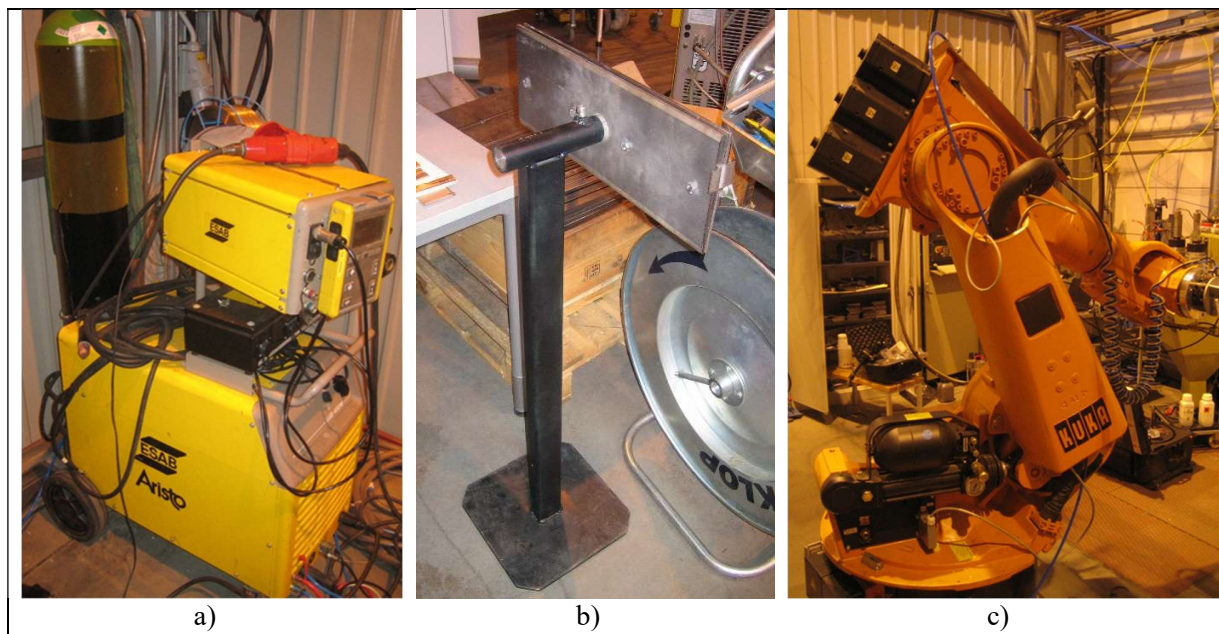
Welding set-up used in the experiments: a) Gas tungsten arc welding machine, b) welding jig with rotatable fixture, c) articulated arm robot for execution of welding movements.
